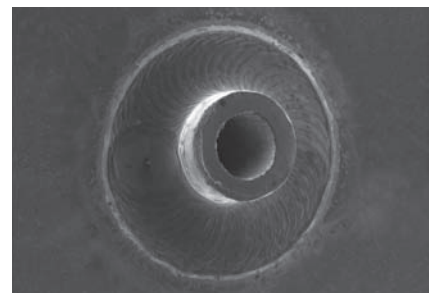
Example for laser welding of nickel foil with hologram
